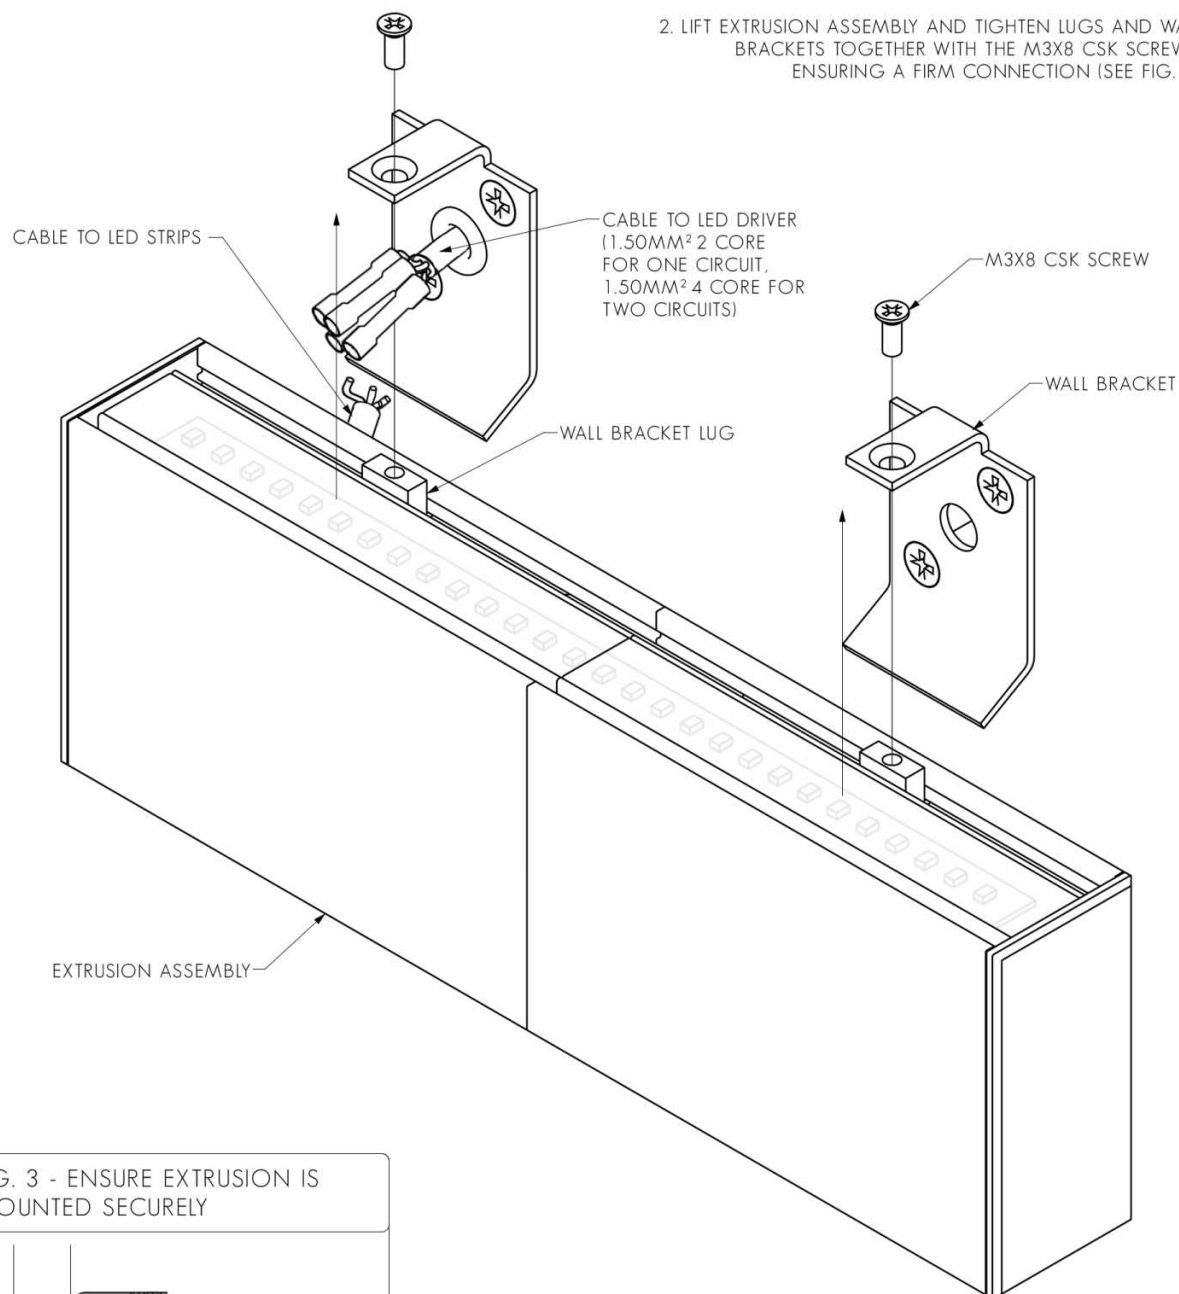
ENSURE EXTRUSION IS MOUNTED SECURELY
